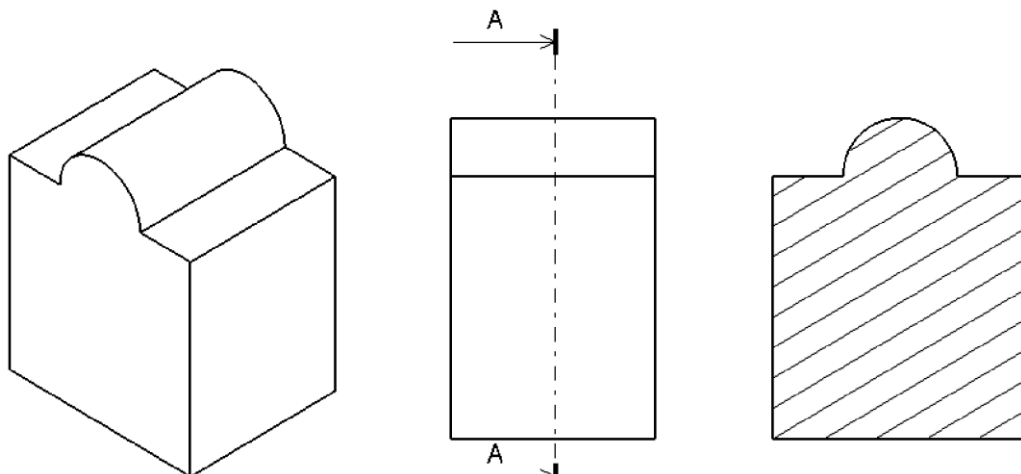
3D solid part views (Isometric view, View from side, Section Cut view)
